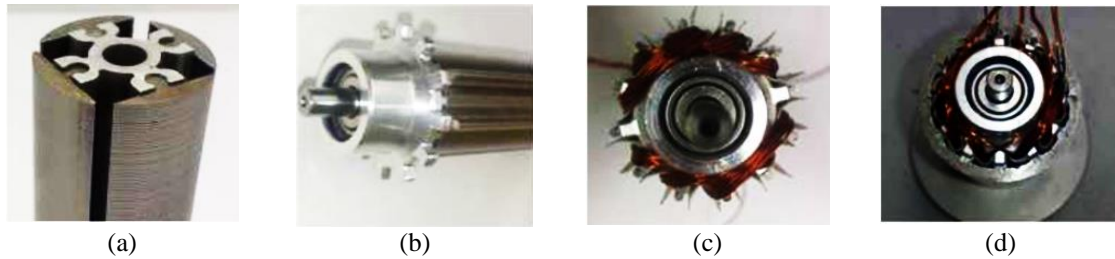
The assembly of the SynRM with a segmented rotor machine: (a) complete mounted rotor, (b) mounting the teeth on the bearing housing, (c) complete winding on the already mounted teeth, and (d) completed Syncrel motor assembly
